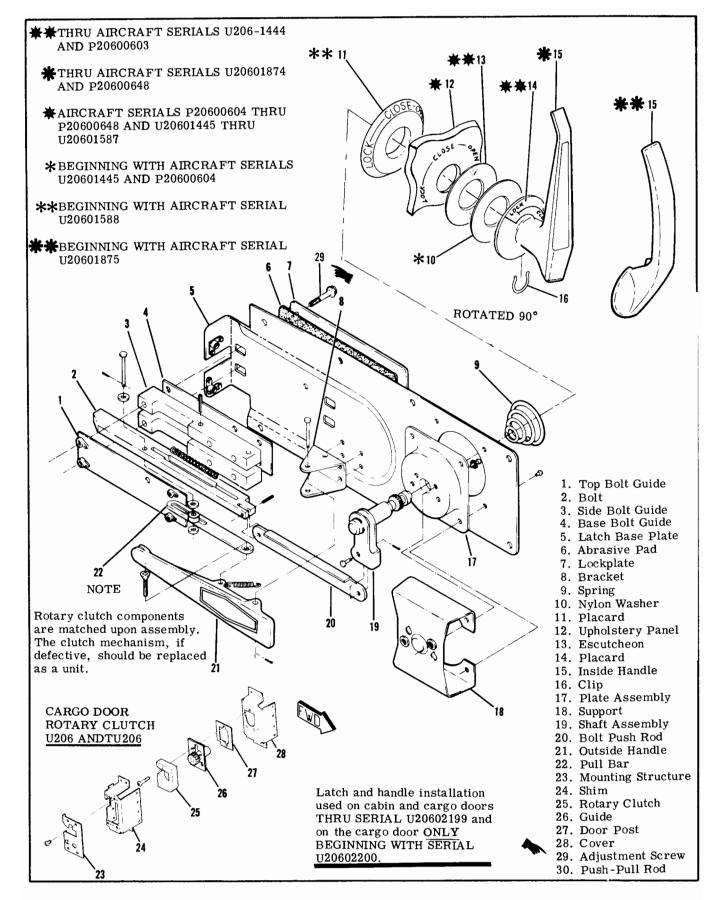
Door Latch and Rotary Clutch Components (Sheet 1 of 2)
